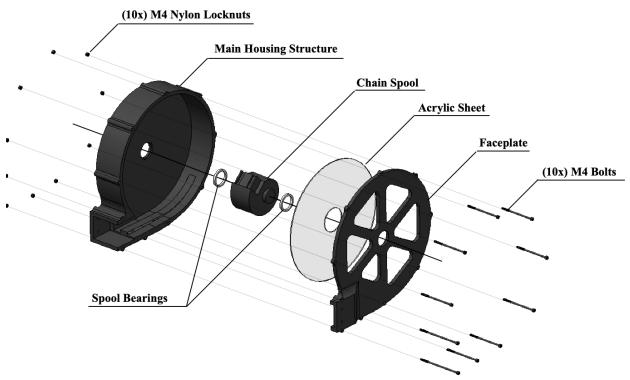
Exploded view of presenter housing assembly with callouts for relevant components.
